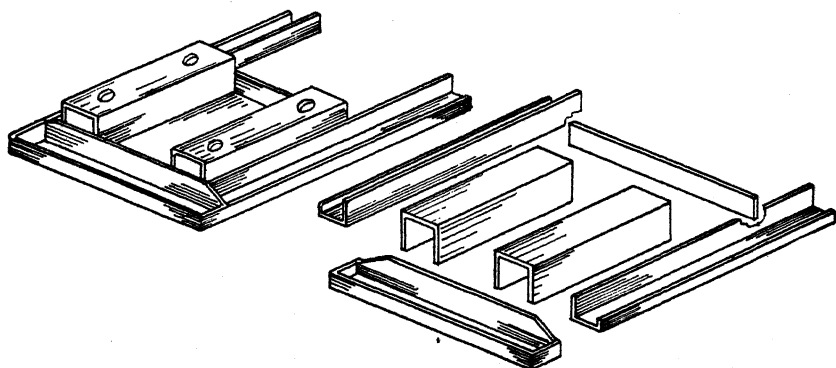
Detail of the end of a base welded from formed plates shaped into channels for a rigid, light, strong construction.
